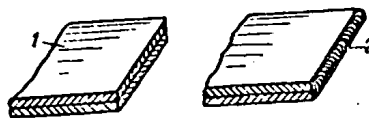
Side joint (1) and welded seam (2)
